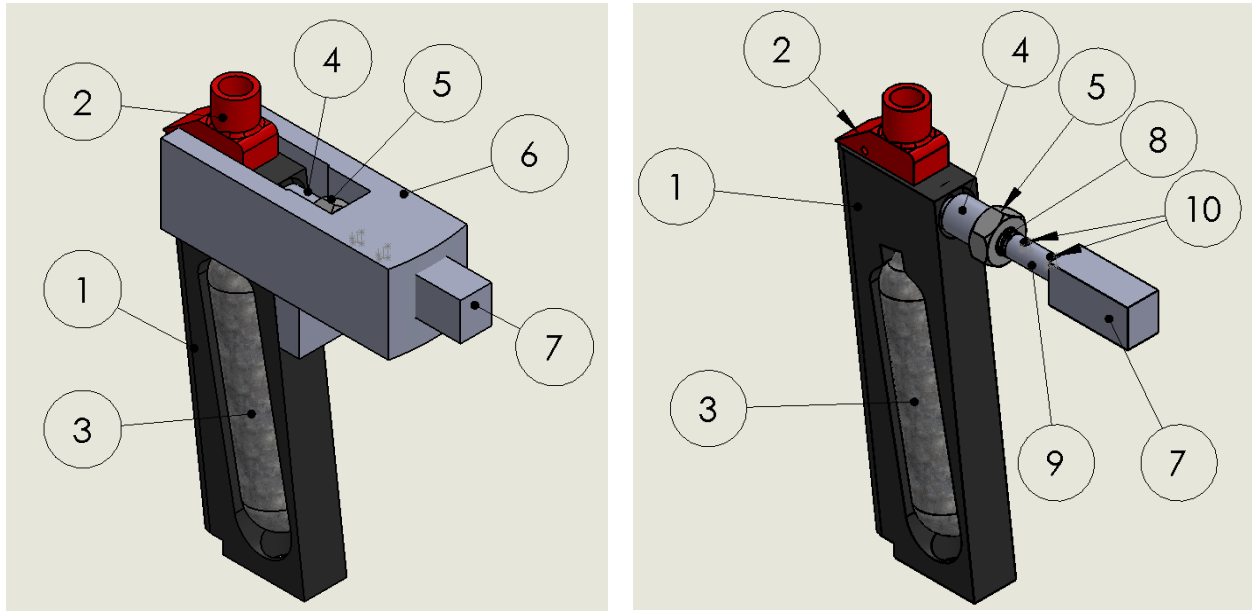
Final CO₂ assembly, with housing (left), final CO₂ assembly, without housing (right).
